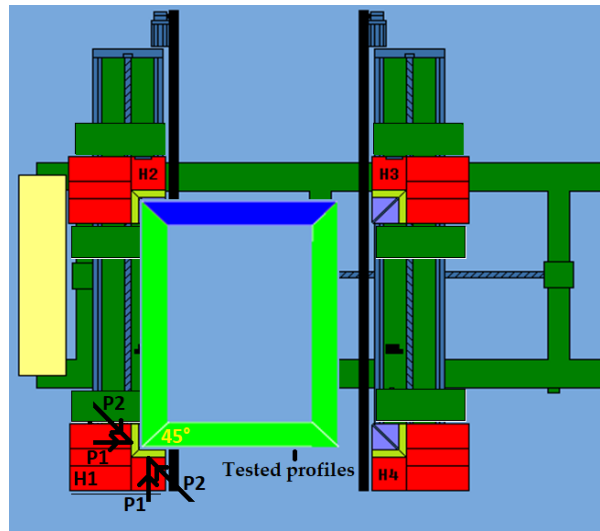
Schematic of the H1 welding-head feed rate during welding: P1 – commanded physical feed rate (set and controlled), P2 – effective feed rate resulting from the 45° mitre geometry (projection of P1), H1, H2, H3, H4 – welding heads [12]
